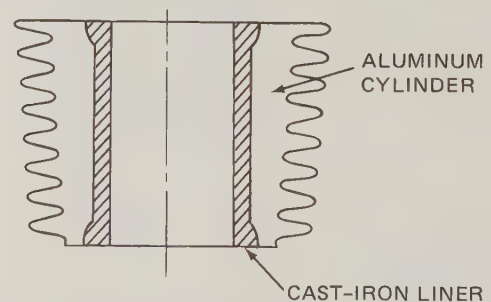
Aluminum cylinder with a cast-iron liner.
